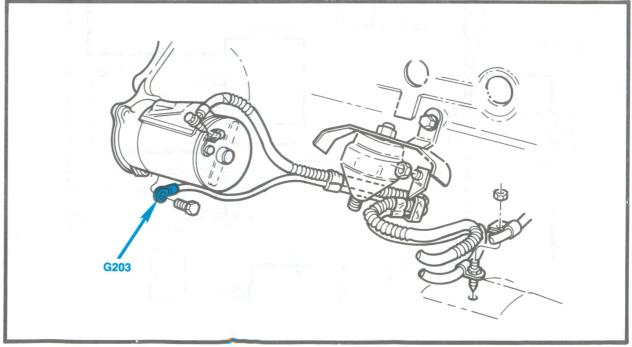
Lower RH Side of Engine (4.9L 6 Cyl. ONLY)
